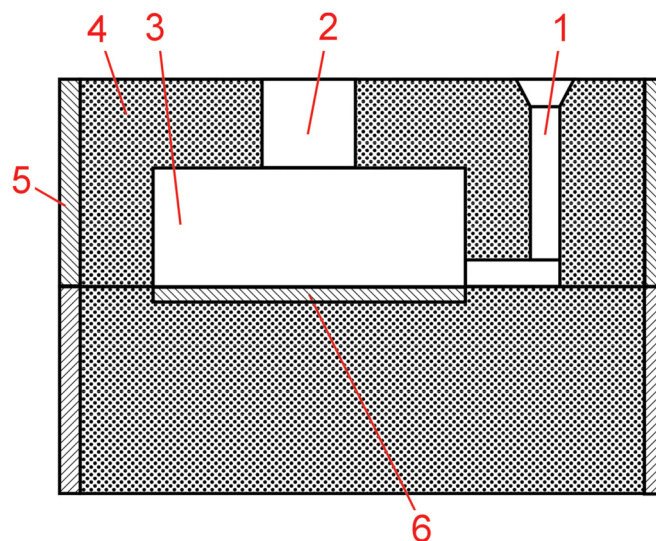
Scheme of a sand mould technology for bimetallic casting: 1 – gating system, 2 – flow-off, 3 – mould cavity, 4 – moulding sand, 5 – moulding box and 6 – stainless steel plate
